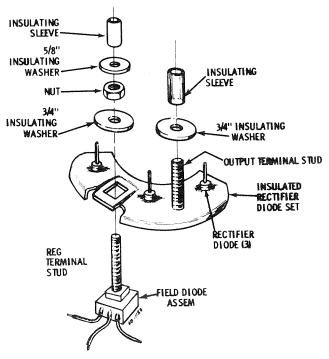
FIELD DIODE ASSEMBLY DETAIL (FIELD DIODE MODELS)
